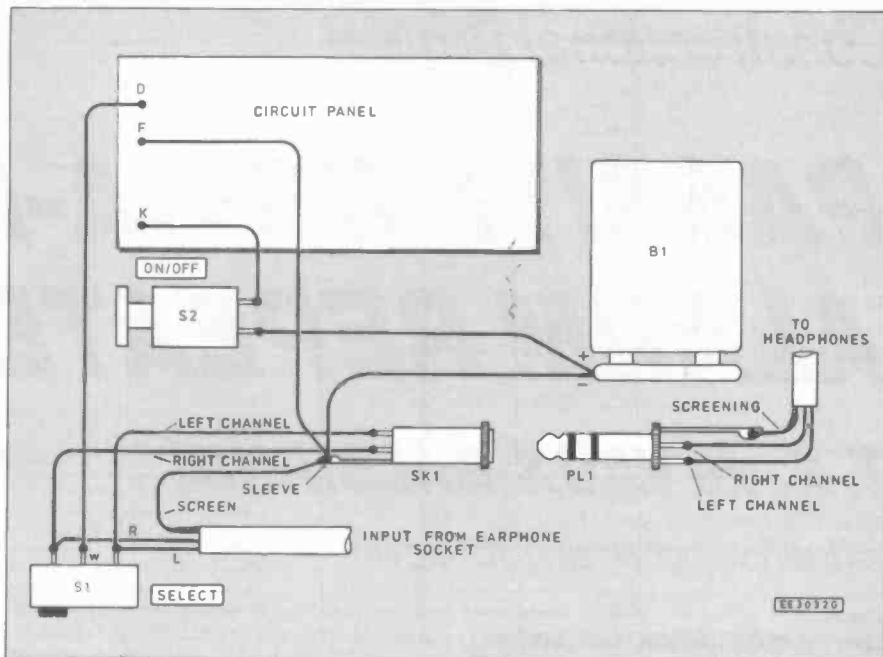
Interwiring to all off-board components. The screened lead from the select switch S1 should also be terminated with a suitable jack plug for the player/radio.
